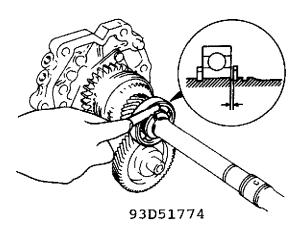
Measuring Clearance Between "C" Washer & Rear Bearing (M-Type)
